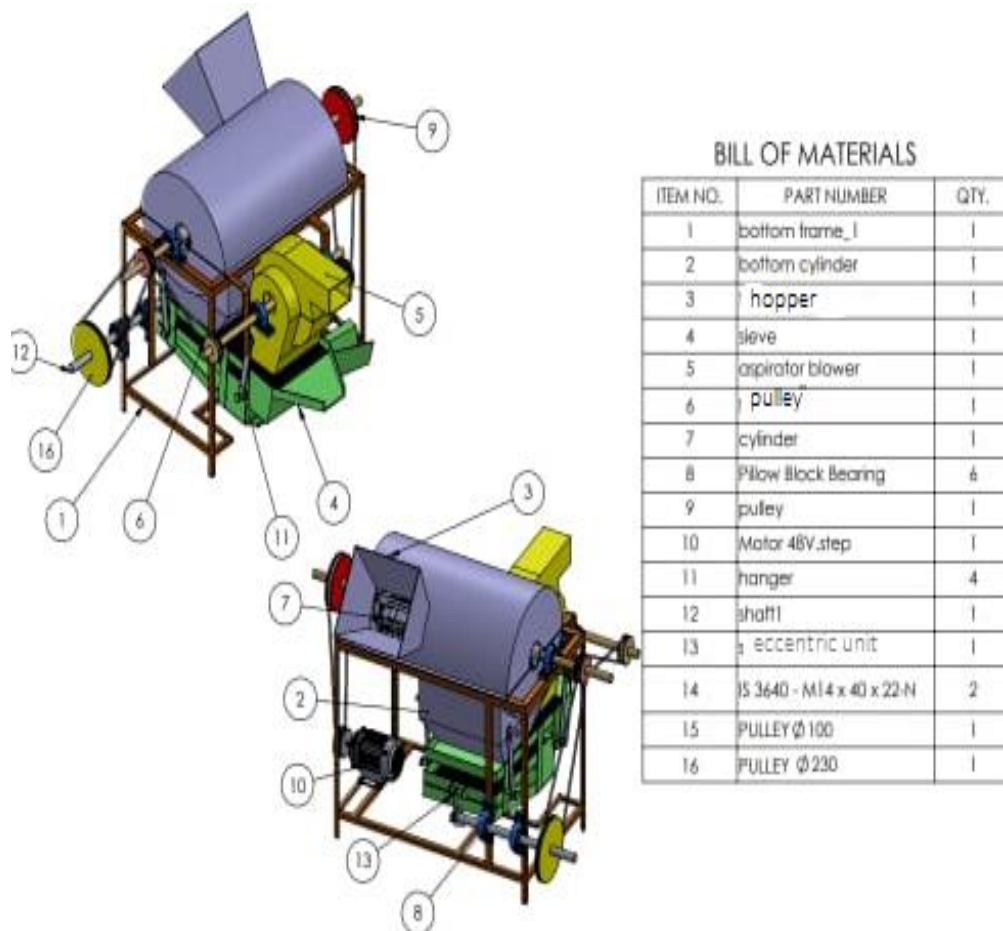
Isometric view of developed machine (SOLIDWORKS)
